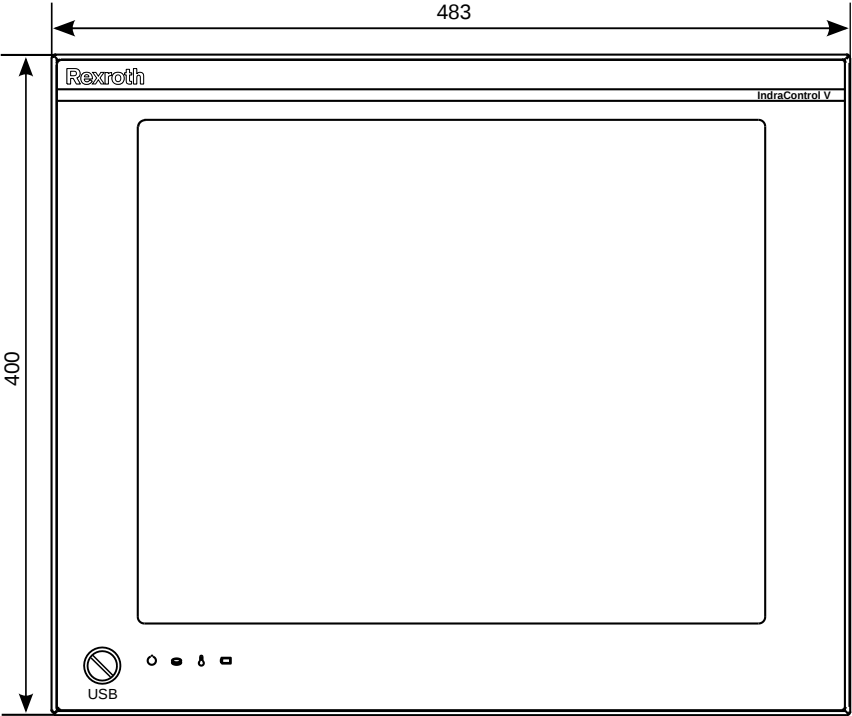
Dimensions: Front panel of the VDP 60.3
